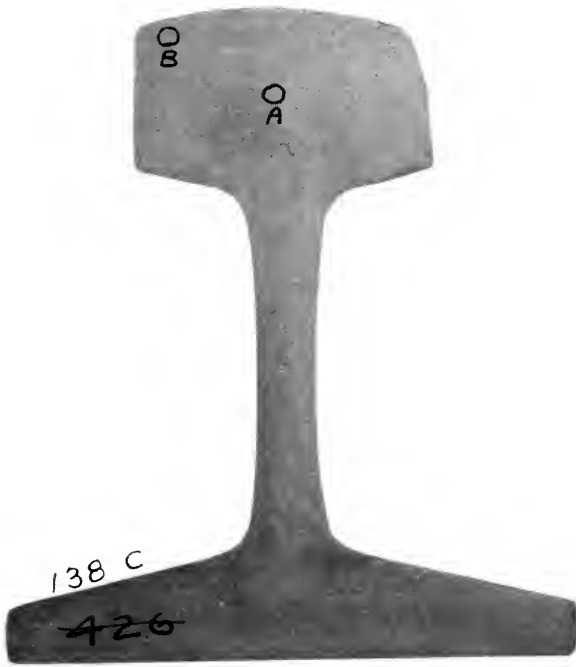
C. LIGHT ETCHING OF RAIL 138.
